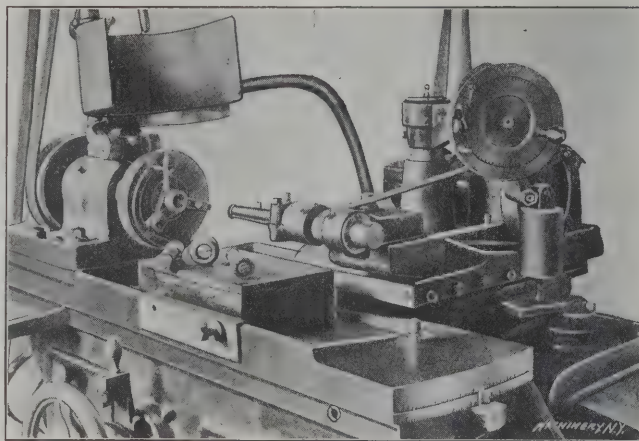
Grinding the Bore of the Cams Concentric with the Cylindrical Surface
